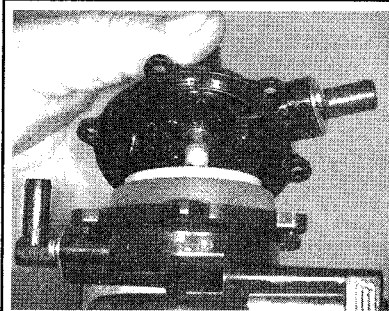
then lift the inlet housing, carefully pulling the pump off the oil piston
